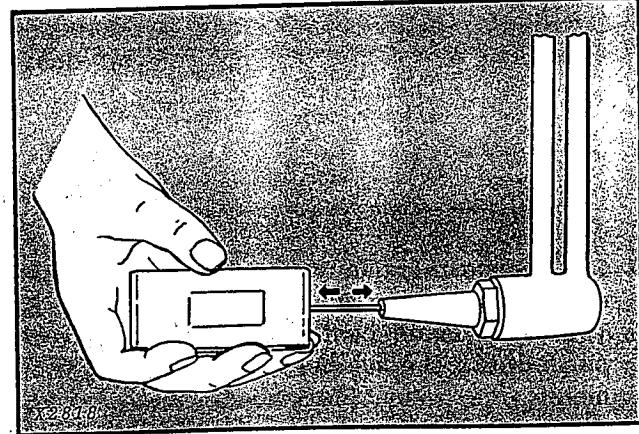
Using A Welding Tip Orifice Cleaner
